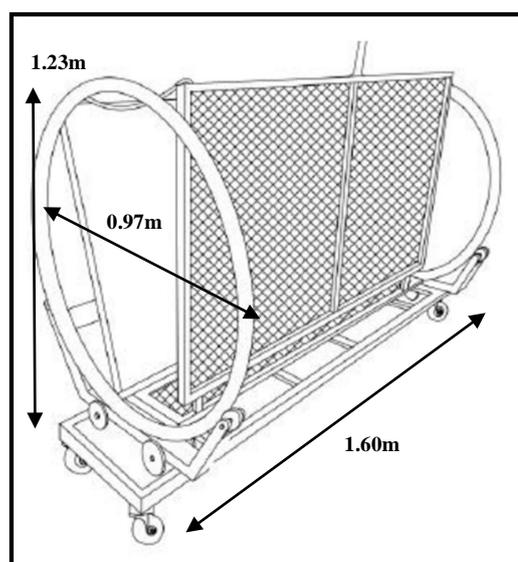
Dimensions of Goat/Sheep Holding Cage Slaughtering Mechanism
